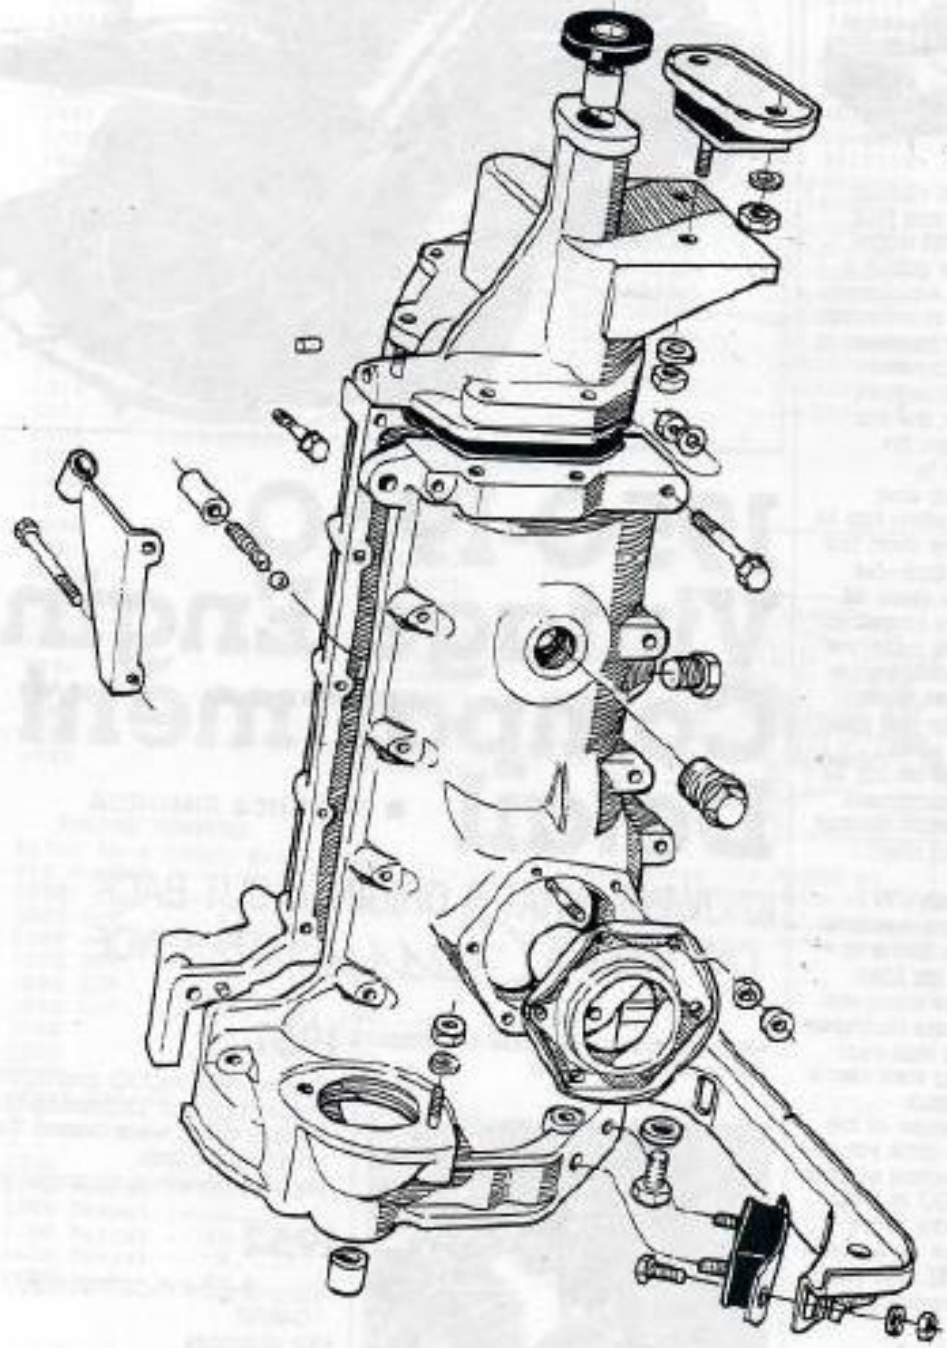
GEARBOX AND FINAL DRIVE CASING AND COVERS.
